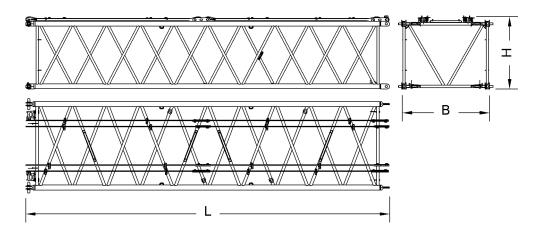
2821 boom section dimensions 40 ft for LR1300/LR1300W
